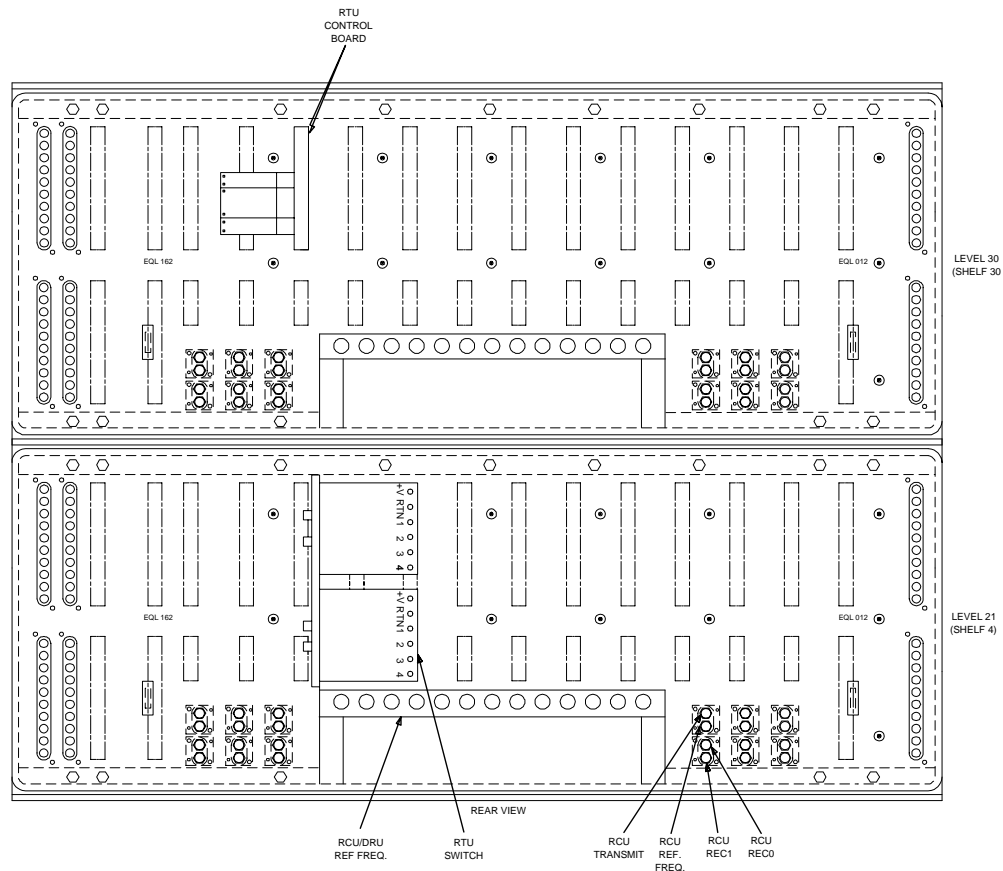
Radio Test Unit (RTU) Control Board (AYD8) and Switch Assembly (ED3R026-30) Location
